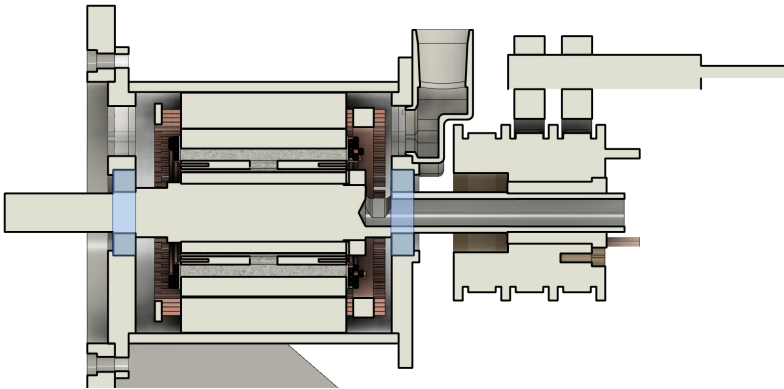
Radial section of the 3D CAD model of the prototype, highlighting the bearings in blue.
